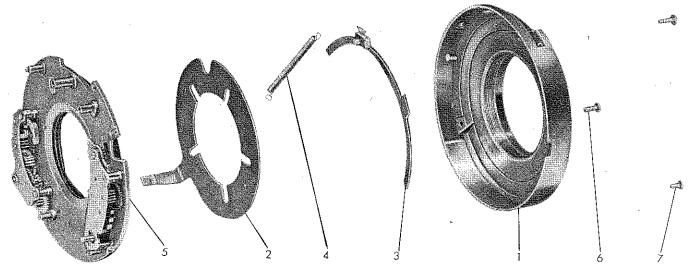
Shutter Mechanism Plate Complete, Exploded from Case
